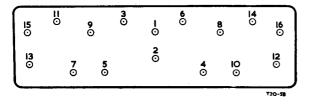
DIESEL ENGINE CYLINDER HEAD BOLT TIGHTENING SEQUENCE
